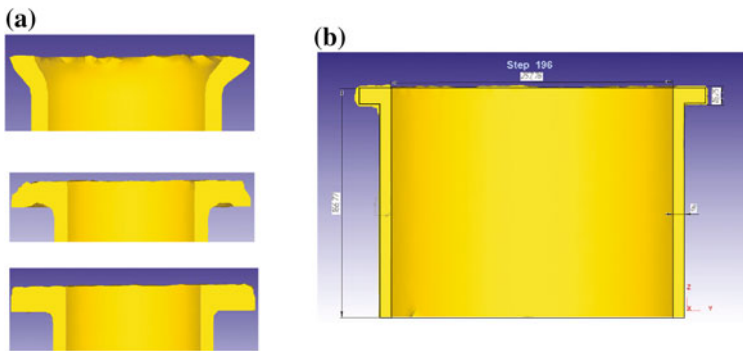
Simulation of the rotary forging of a flange with multi-upsetting of the tube blank (a) and comparison of a formed profile with required profile of the flange (b)
